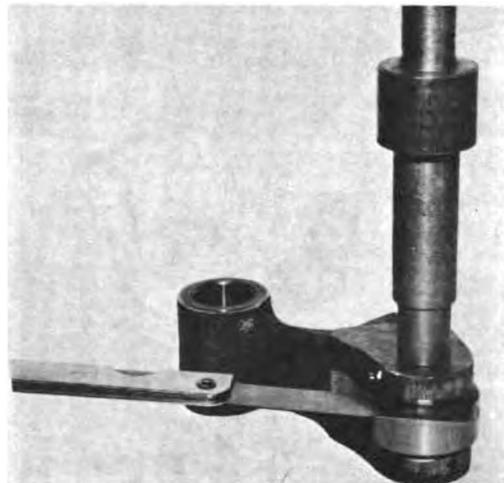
(N10406). Install The Roller And Roller Pin.
